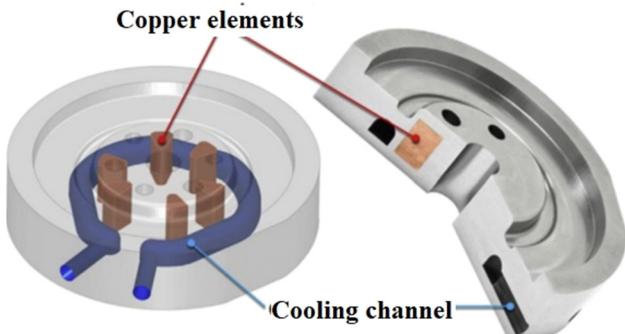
AM with copper and tool steel with cooling channel-drawing [1].
